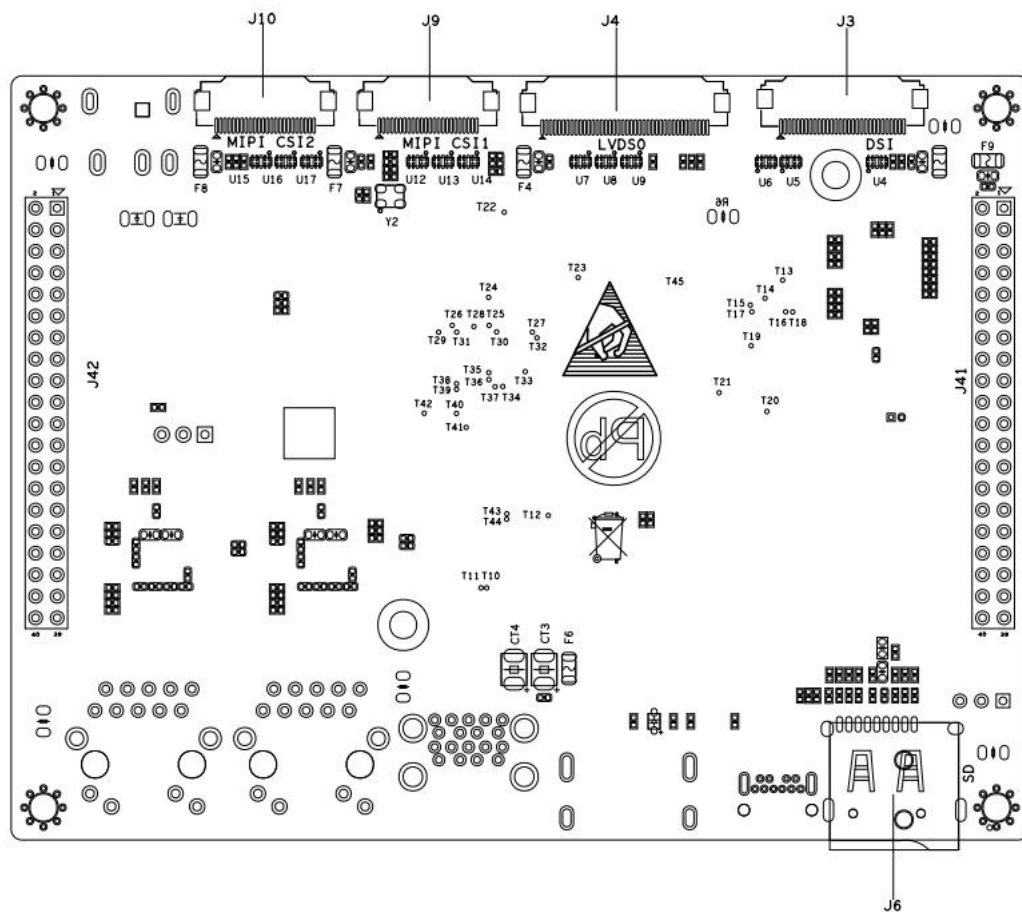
2 MYD-LT527M Interface Layout Bottom View
